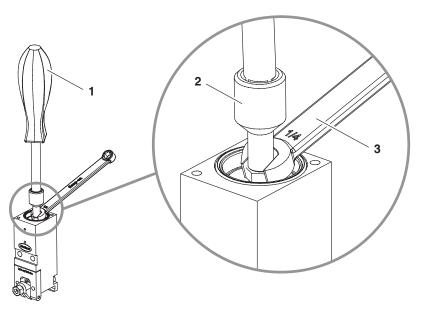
Using the stem wrench tool and an open-end wrench to tighten the 5-40 nut
